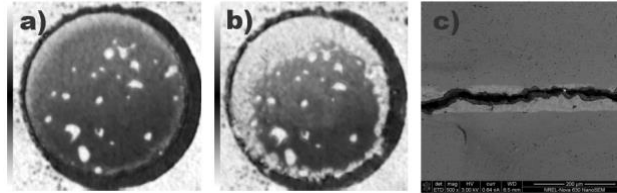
C-SAM image of a SnBi solder joint after a) 1000 thermal cycles (TC) and b) 3900TC; c) SEM cross-section of a separate joint demonstrating cohesive cracking through the solder layer.
